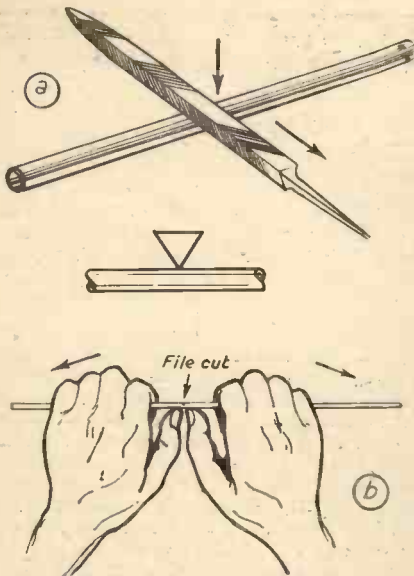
(a) Method of using file when cutting glass tube. (b) Position of hands when making a break.
